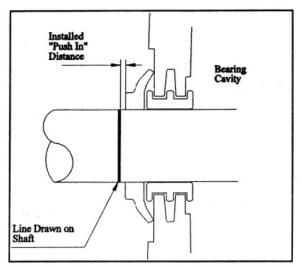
Installed "Push In" distance shown at the final installed position of the PenTac Seal.
